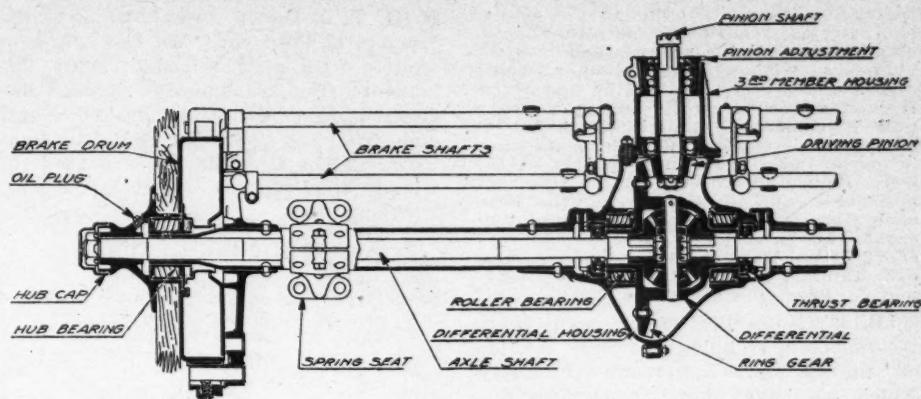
Sectional view of rear axle on the 1918 Oakland 34 B
